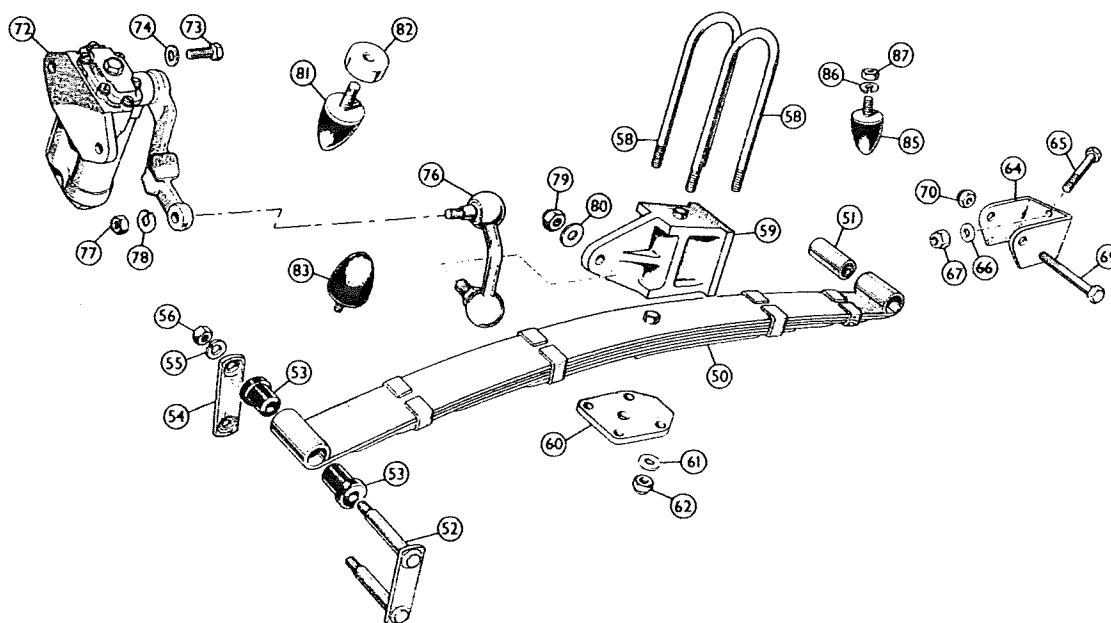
Exploded View Of TR4A Solid-Axle Rear Suspension
